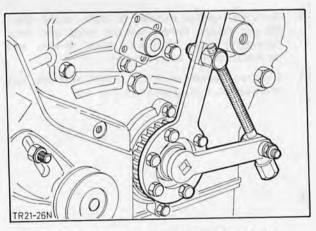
Slacken crankshaft hub bolt using Special Tool 21-018/019
